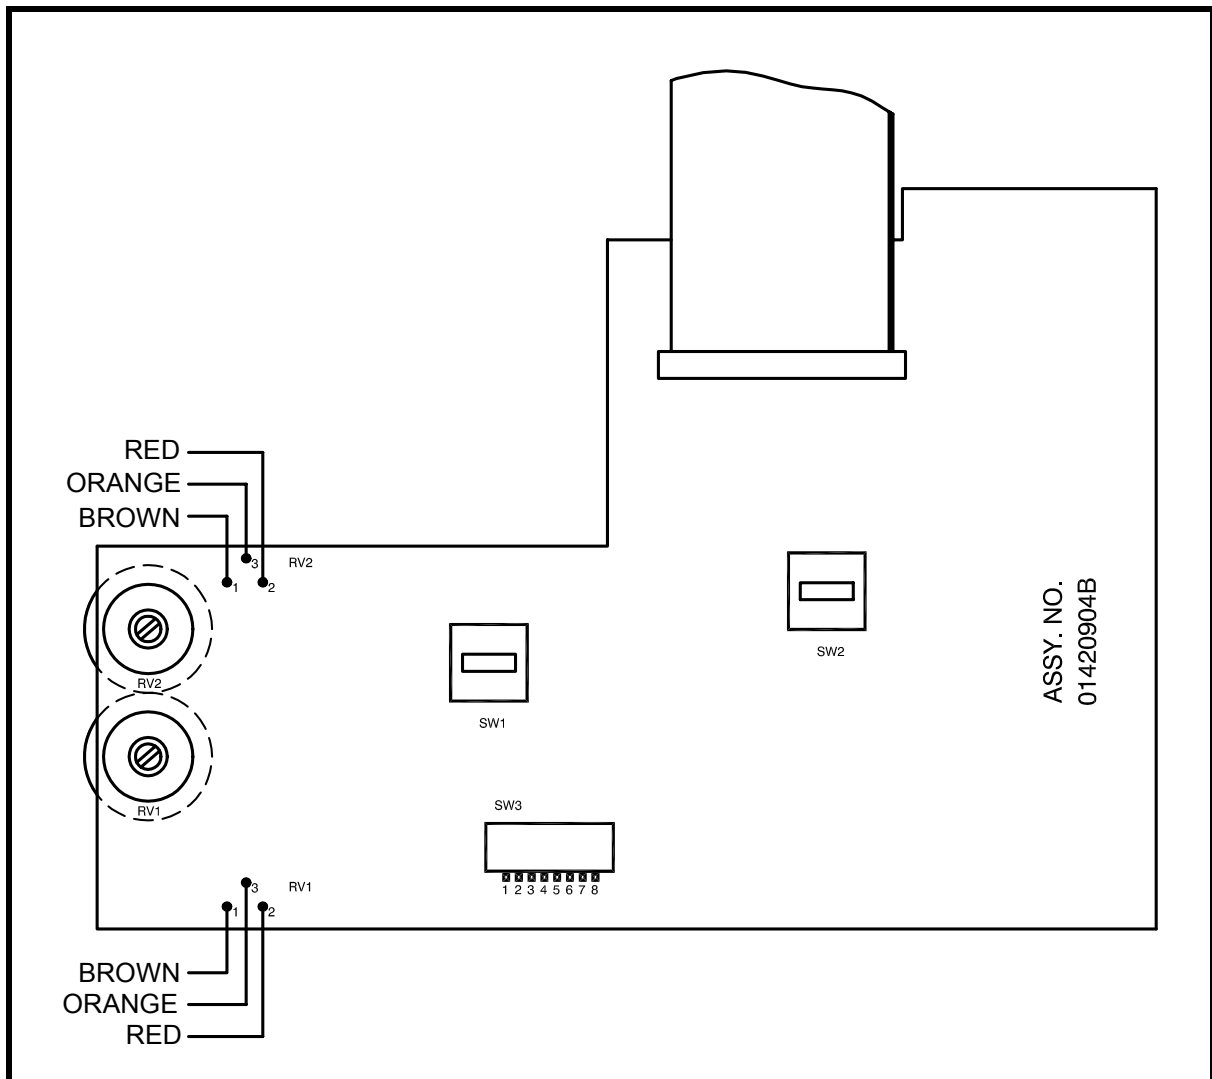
Component Layout, Front Panel PCB (01420904B)
